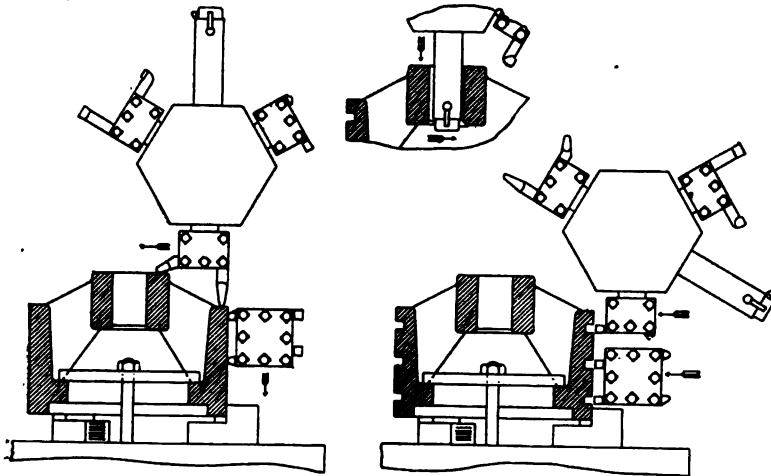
OPERATIONS PERFORMED ON CAST-IRON PISTON HEAD WHEN MACHINED ON BULLARD VERTICAL TURRET LATHE.
